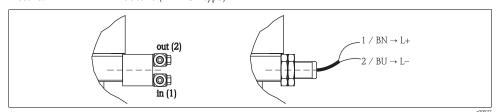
Limit position switches, left: pneumatic (1 = compressed air inlet, 2 = compressed air outlet) right: electric (NAMUR)
